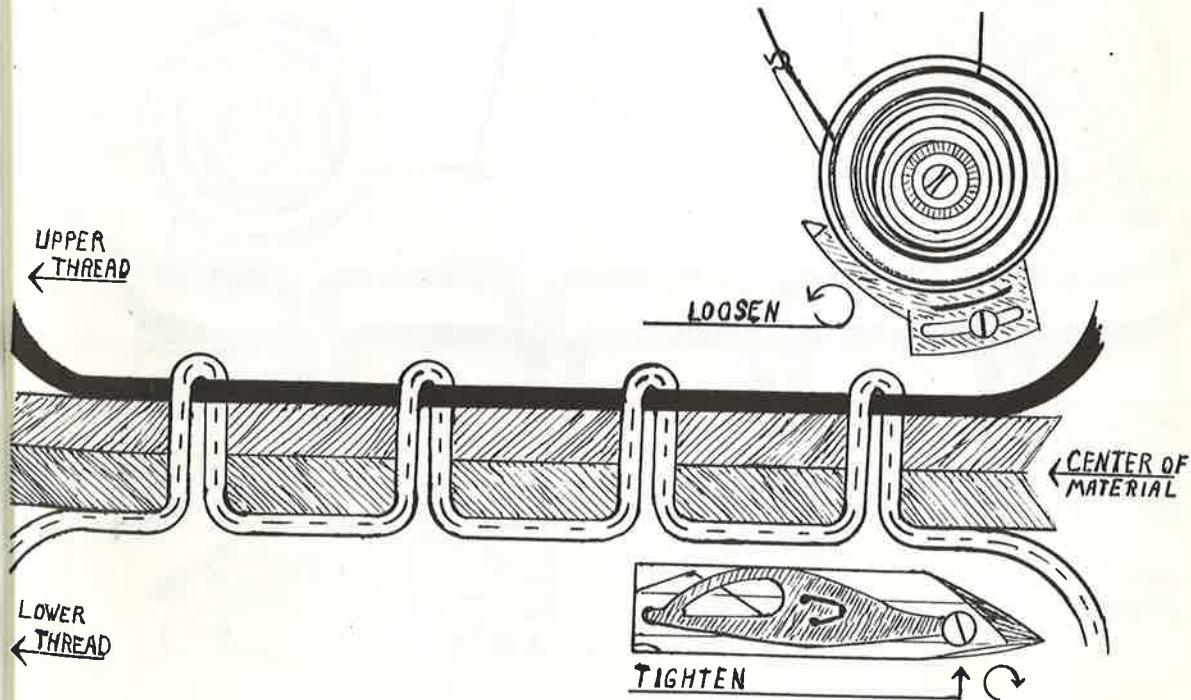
illustrates irregular stitching with upper thread being pulled thru with lower thread running along the bottom of the material.
